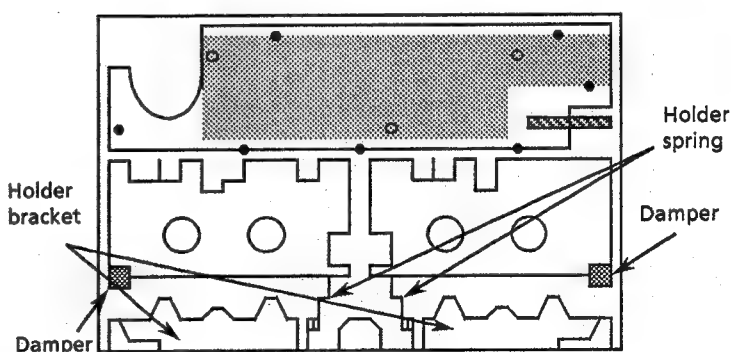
Rear view of the front panel assembly (After removing the mechanism assembly)
